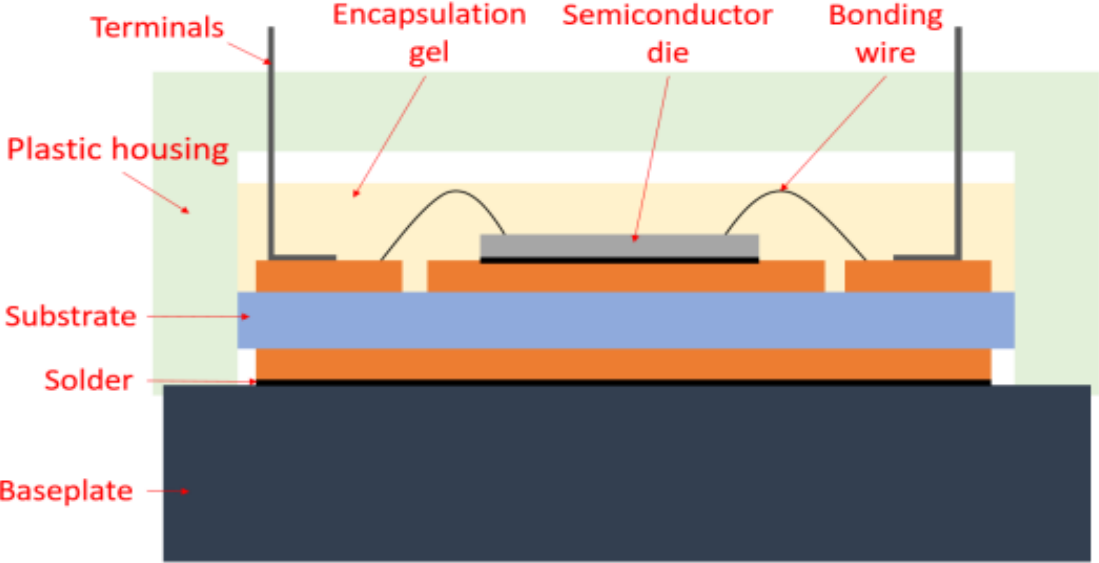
Packaging structure of a conventional wire bonded power module [64].
